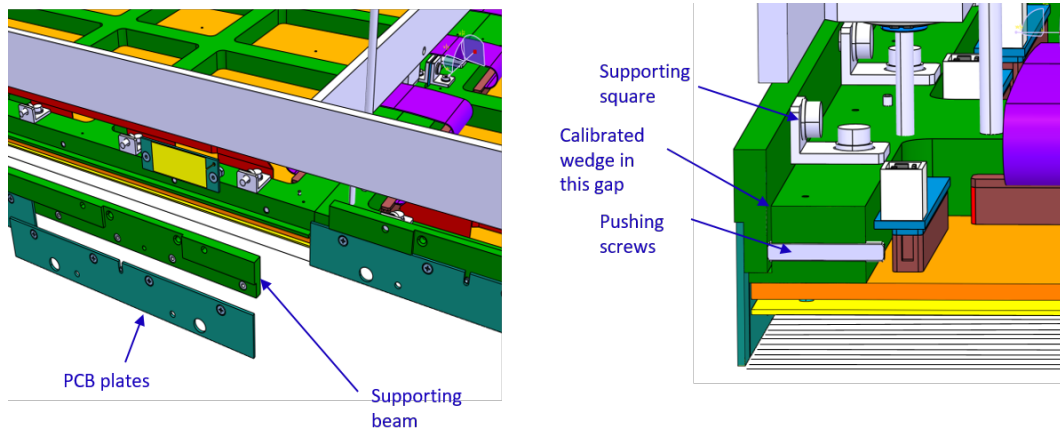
Extraction grid components on the CRP structure. On the left are the PCB plates and their supporting bars. On the right is the wire tensioning system with the pushing screws and calibrated wedges to keep the right distance.
